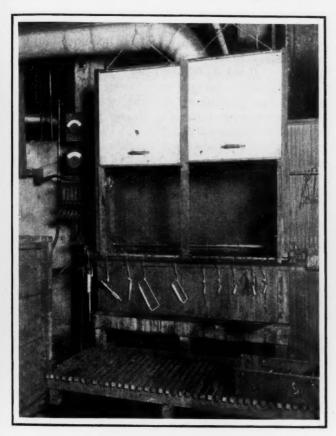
Method of Suspending Tools and Gages for Chromium Plating
